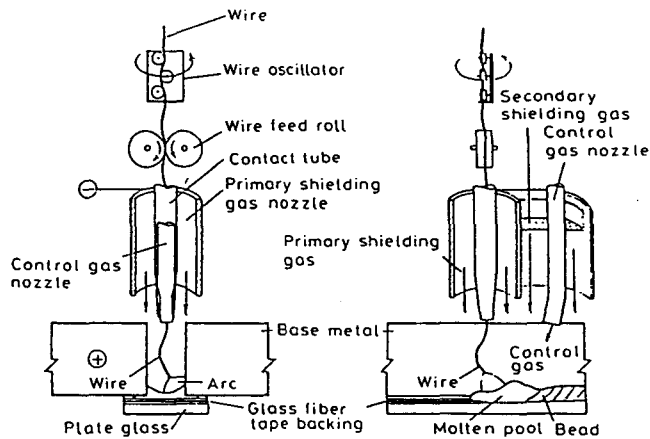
Principles of DCEN MAG narrow gap welding process
